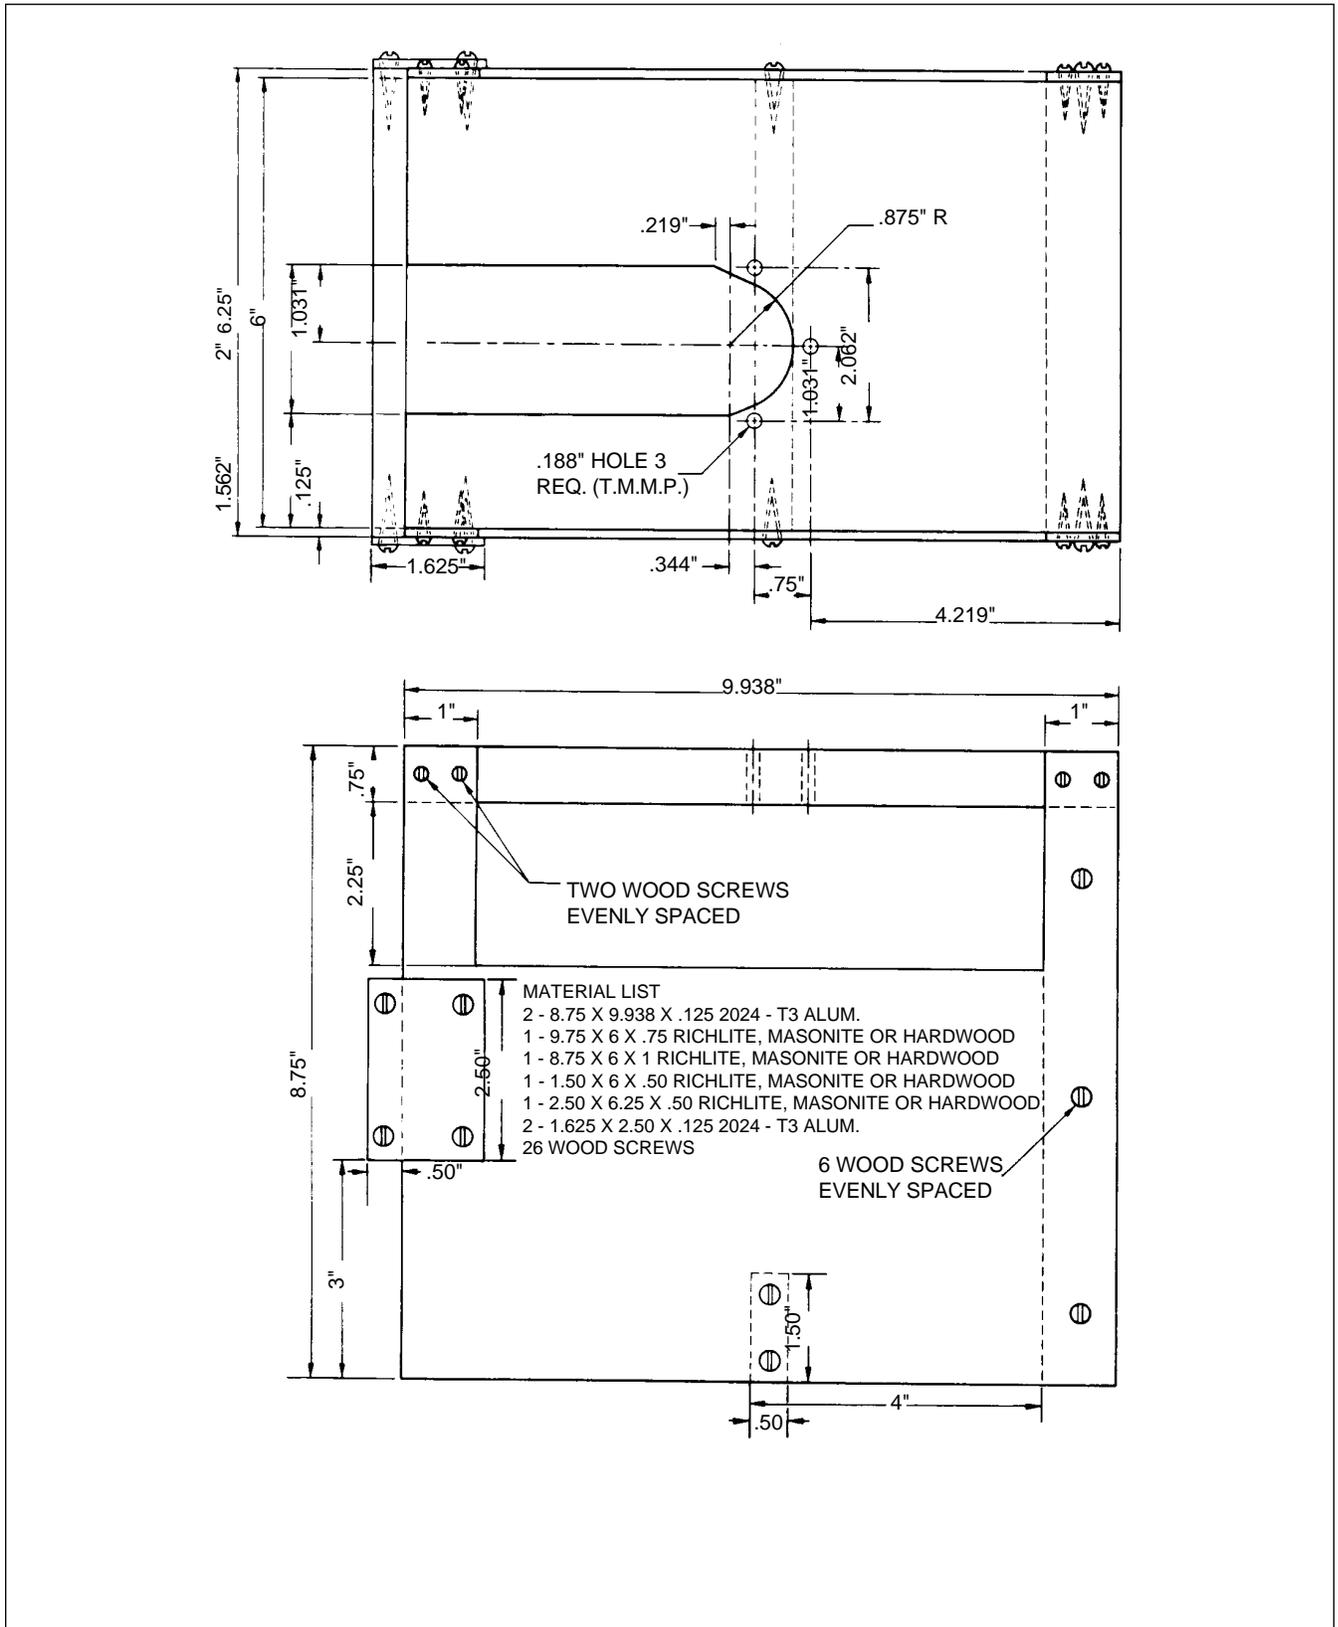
Fabricated Fuel Quantity Transmitter Checking Jig
